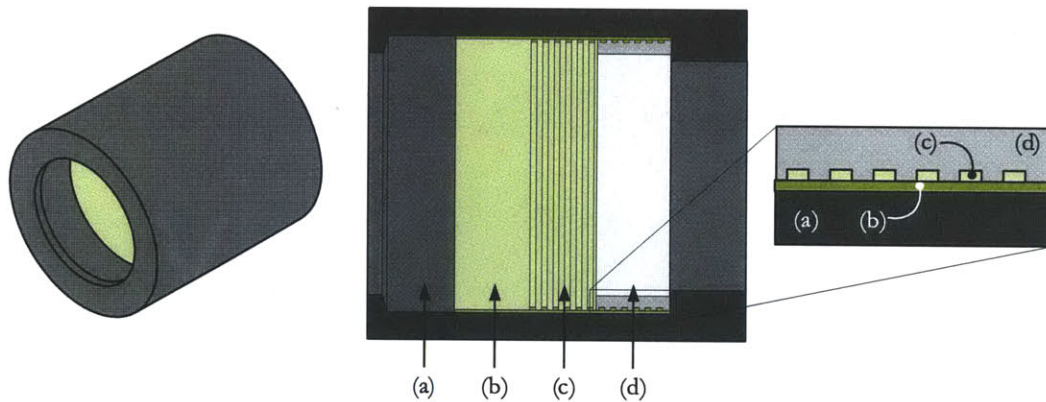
Coating steps required to create a patterned cylindrical stamp: (a) machined drum surface, (b) planarizing layer, (c) patterning layer, (d) stamp layer.
